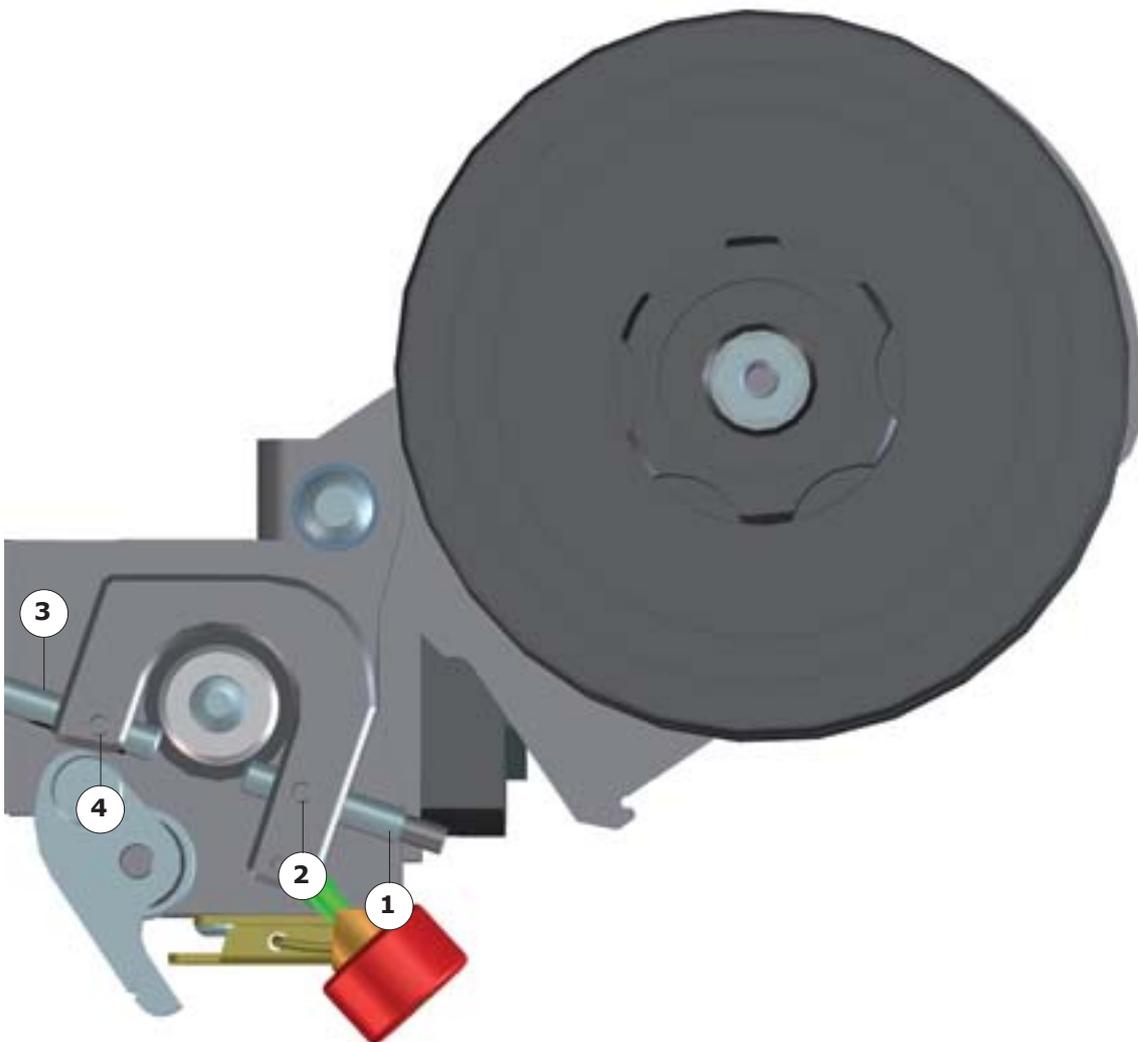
Changing the wire sheaths on the rotating wire feeder
